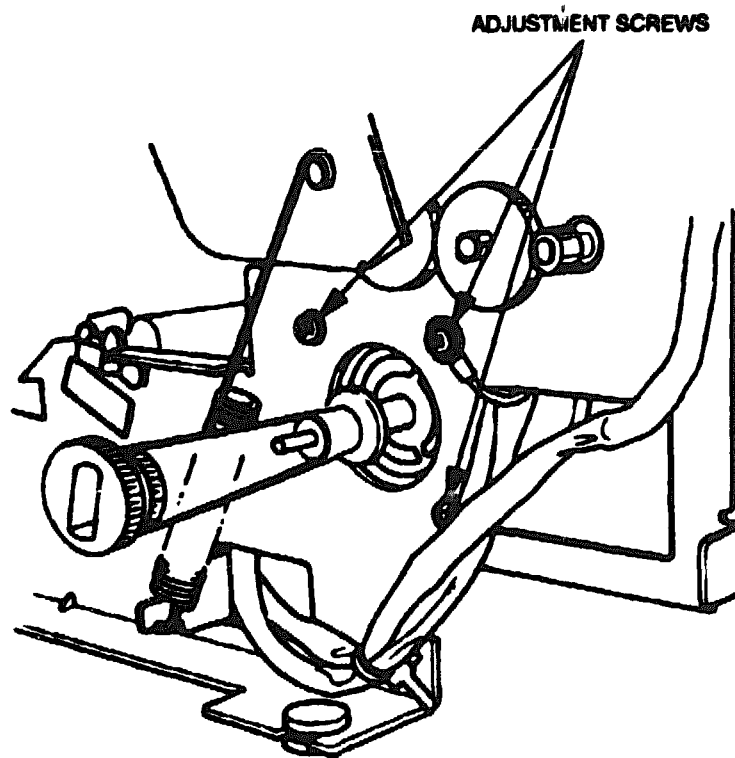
LF Motor Assembly Tension Adjustment Screws
